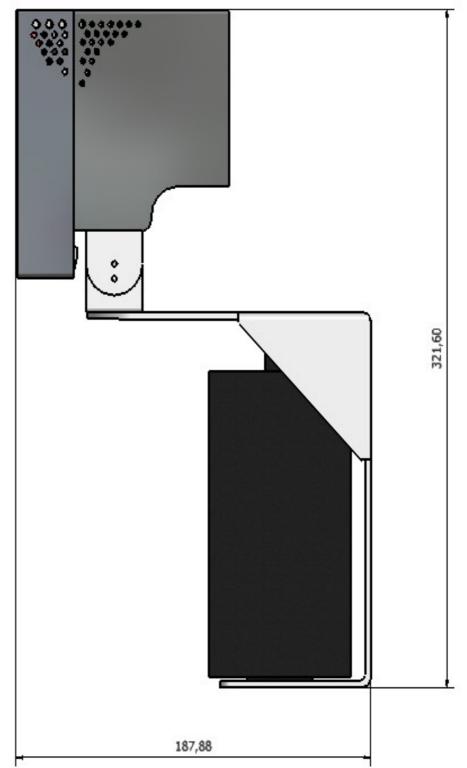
Dimensions of camera and wall-mounting bracket assembled (in mm)
